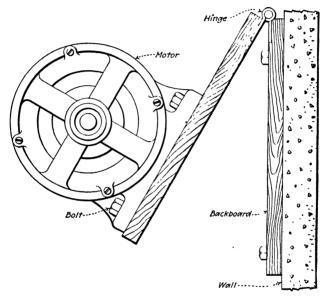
Mounting which was successfully used for a motor for belt driving a small bench lathe. The motor has a cone pulley. A belt tightener is unnecessary. The belt tension remains practically constant. "The shifter rod is placed over the lathe in the usual convenient position, extending to the left where it enters a box which contains a double-throw reversing switch. Moving the rod to the left starts the lathe in forward motion. Moving it to the right causes it to reverse." (A. W. Forbes in American Machinist, Feb. 1, 1923.)
